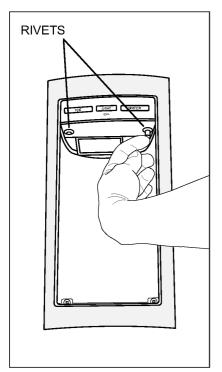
Dispenser Control Panel Removal, Extract rivets
